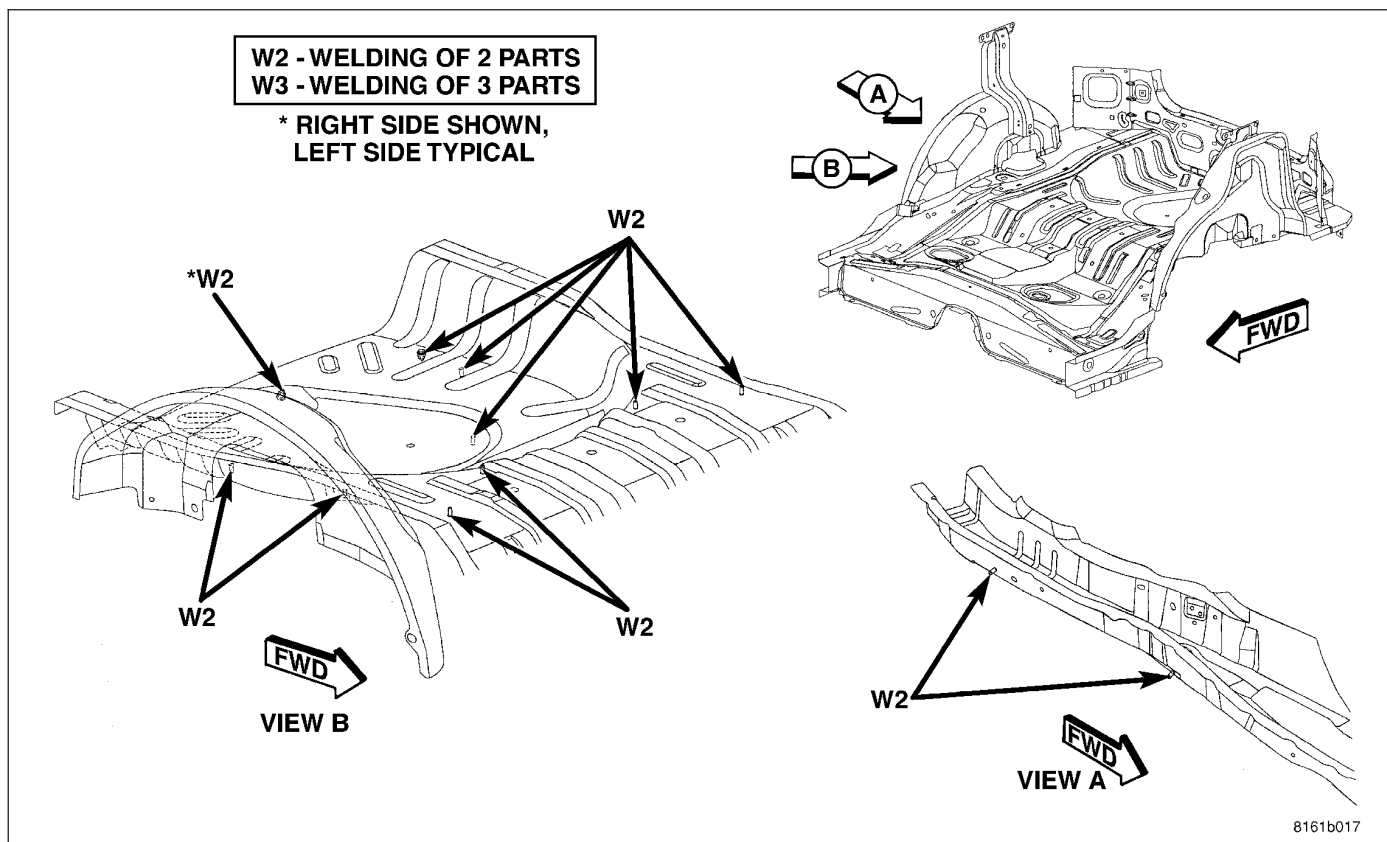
REAR FLOOR ASSEMBLY (14 OF 14)
